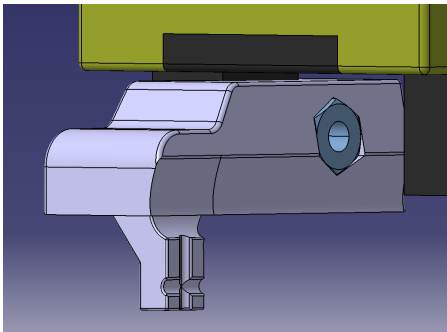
CAD model of gripper design used for Test 2 mounted on the Schunk P50 pneumatic gripper.
